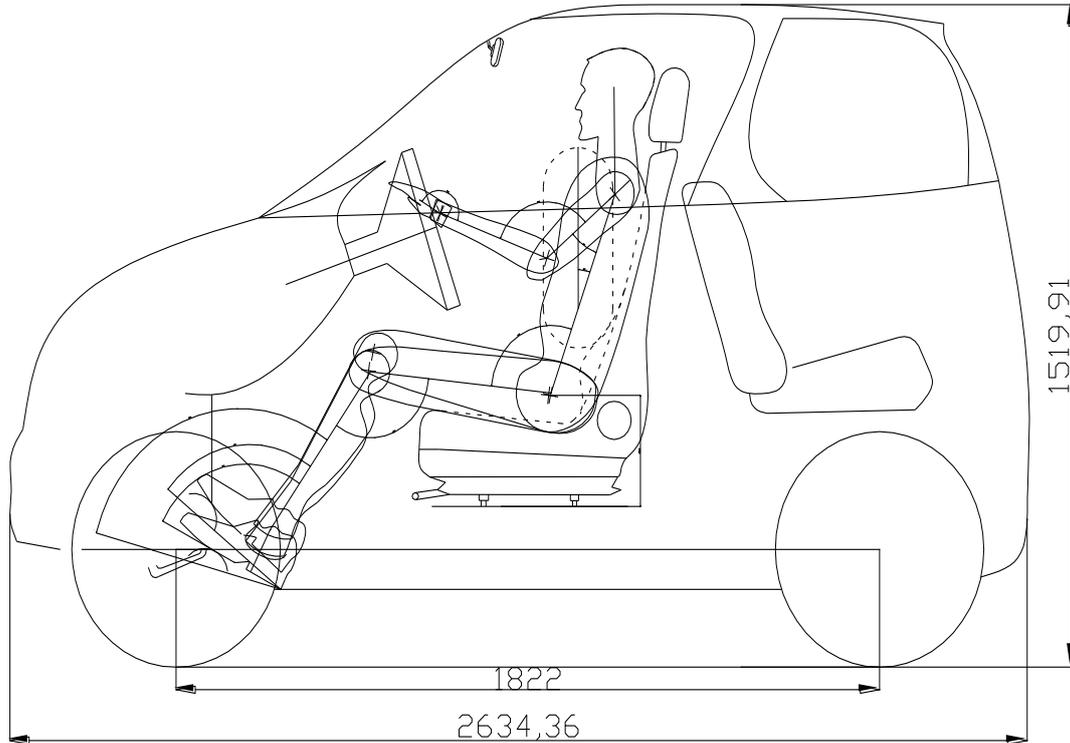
The location of the driver and passenger seats for a compact vehicle being developed
